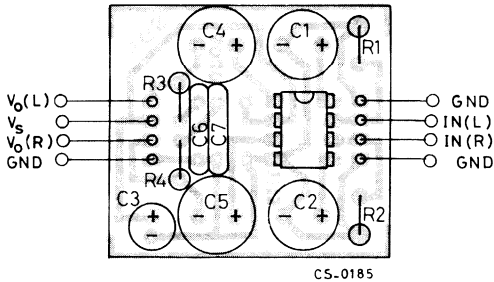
P.C. board and component layout of the circuit of Fig. 1 (1 : 1 scale)
